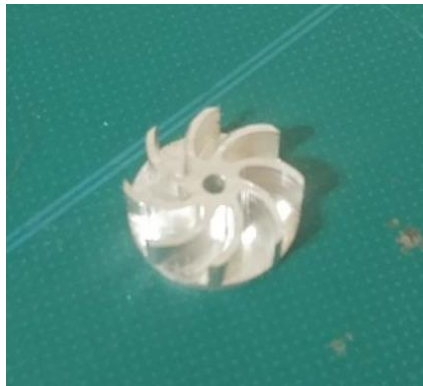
Aluminum Prototype for 8 Blade Centrifugal Impeller Pump
